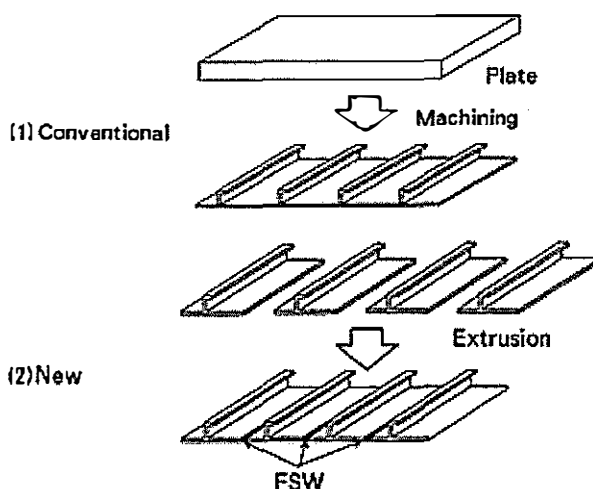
Large integral wing panel made by friction stir welding^{117, 131)}
